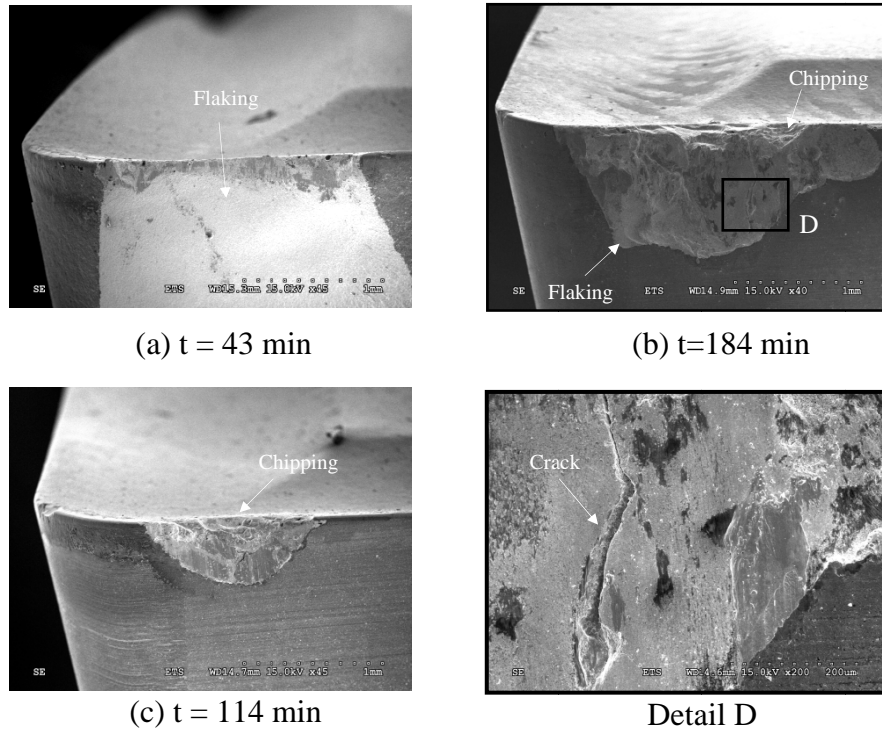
SEM micrograph of tool wear (insert 1) after wet machining of a) P20-AIR MELT, b) P20-ESR and c) DIN 1.2711 AIR MELT at cutting speed 100 mm/min.
